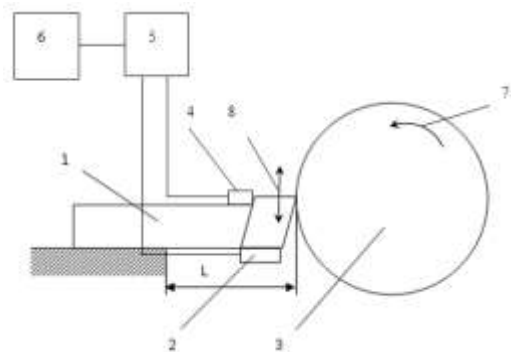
Mounting scheme of power harvesting element on turning tool: 1 - turning tool; 2 - power harvesting element; 3 - work piece; 4 - accelerometer KD 91; 5 - oscilloscope Pico Scope 3424; 6 - PC; 7 - cutting direction; 8 - vibration direction of excited tool
